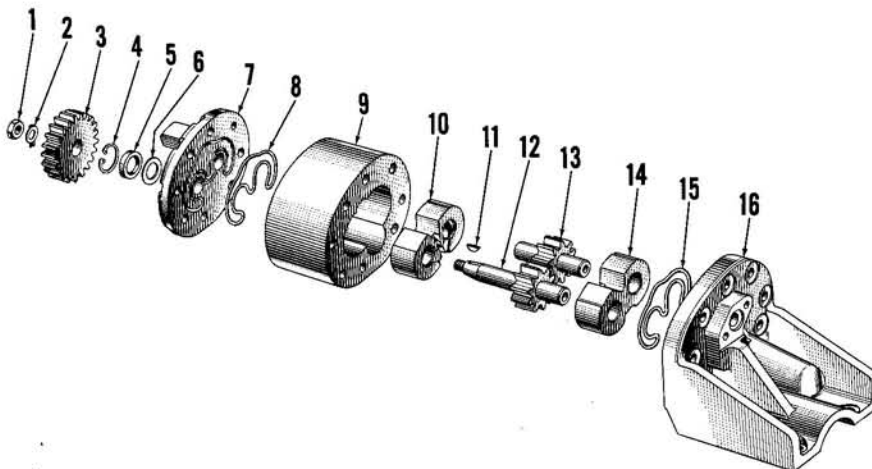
Exploded view of model "FSM" and "New FSM" hydraulic pump assembly. An adapter kit is required to install this pump in model "FMD" or "FPM" due to different location of pressure outlet.
